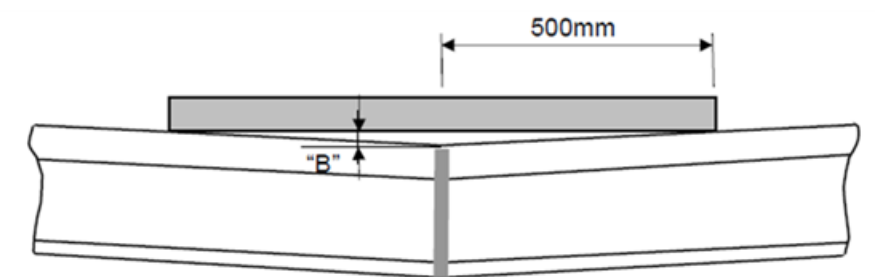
Weld misalignment tolerance in vertical plane (hollow)
